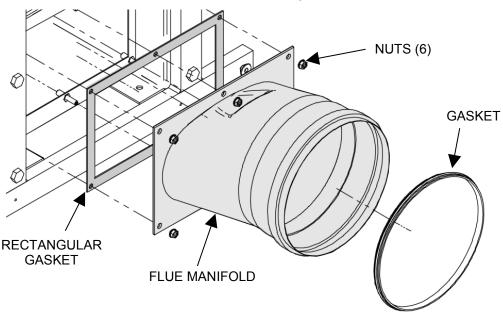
Connection of Flue Manifold To Boiler Exhaust Opening
